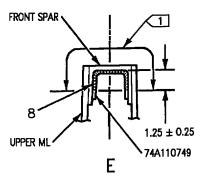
Wing Fuel Tank Sealing (Sheet 1)
